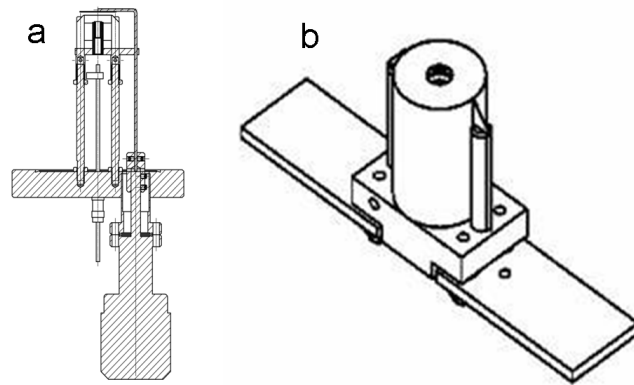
External part of metal evaporator. (a) the whole body of the metal evaporator with a power feed through, (b) the shield that covers the crucible.
